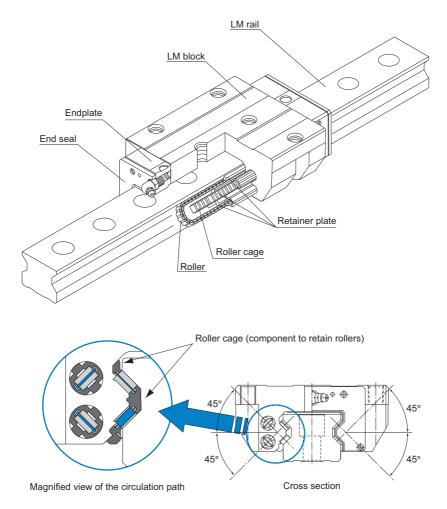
Structural Drawing of the Caged Roller LM Guide Model SRG
